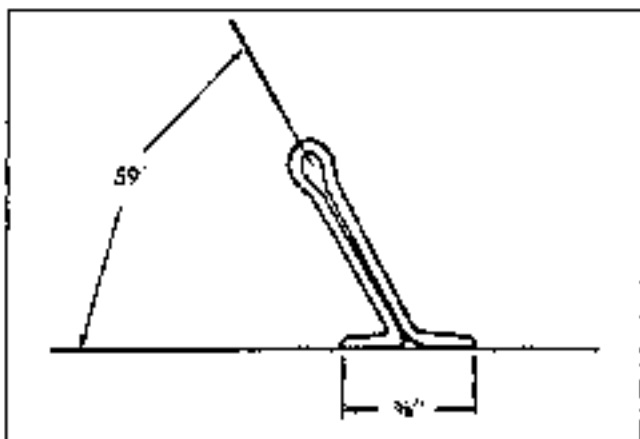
Tool For Removing Upper Half of Main Bearing
